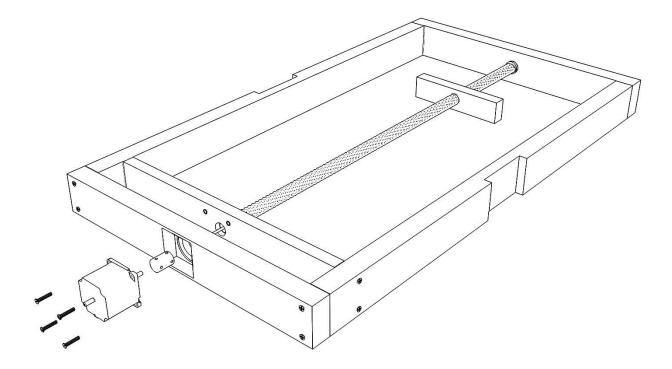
(ADDING THE MOTOR AND CONNECTING IT TO THE THREADED ROD)
